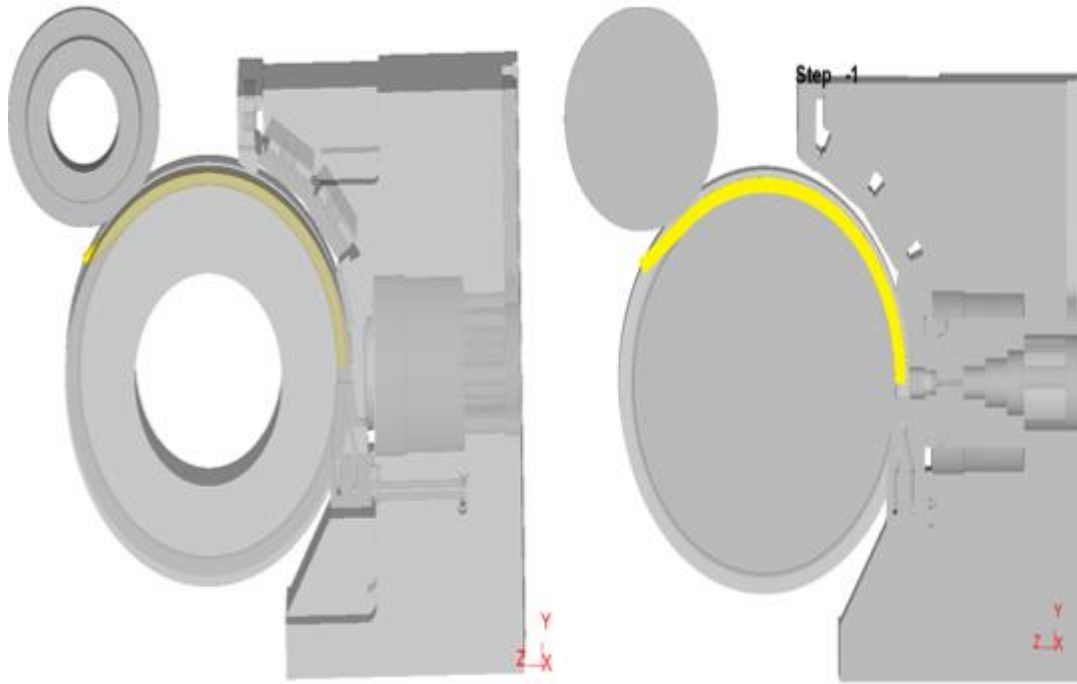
Continuous Rotary Extrusion (CRE) Geometry.
